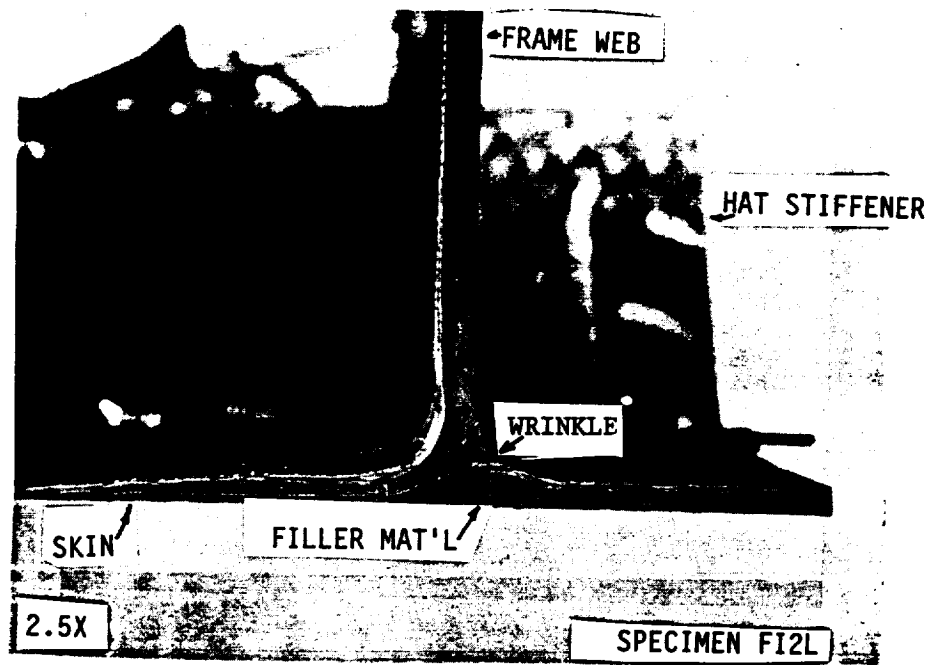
FRAME CROSS-SECTION (FRAME STIFFENER INTERSECTION SPECIMEN)
